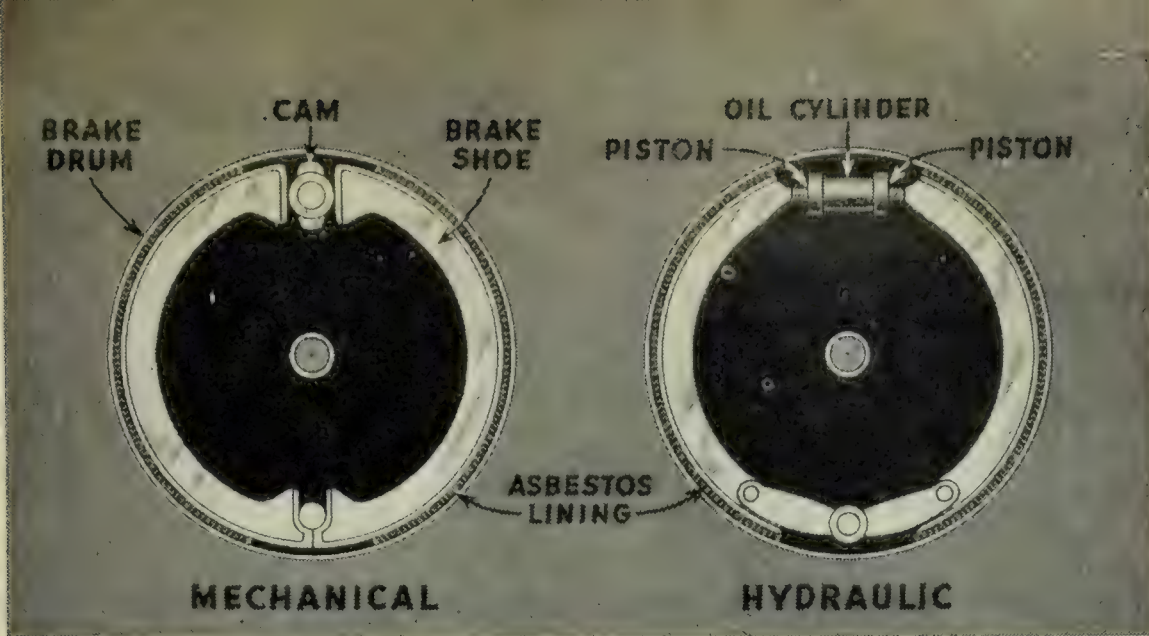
The drawing at the left shows how a mechanical brake is constructed. An hydraulic brake is shown at the right.
